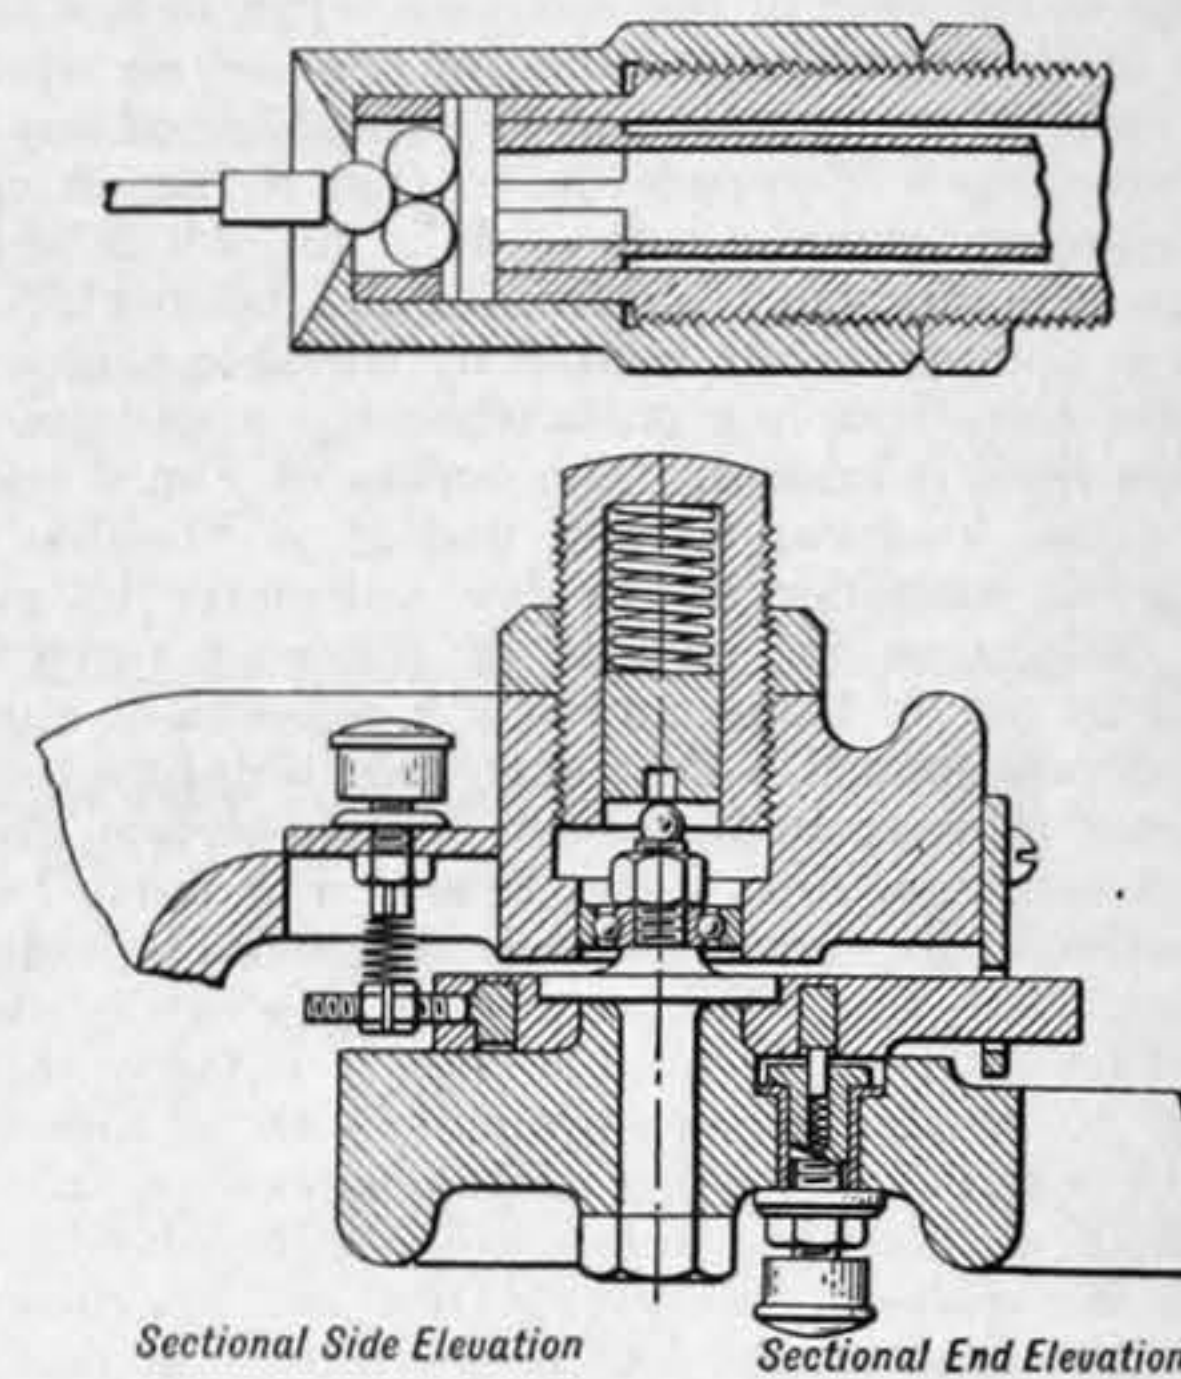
GENERAL ARRANGEMENT OF THE TESTING MACHINE
